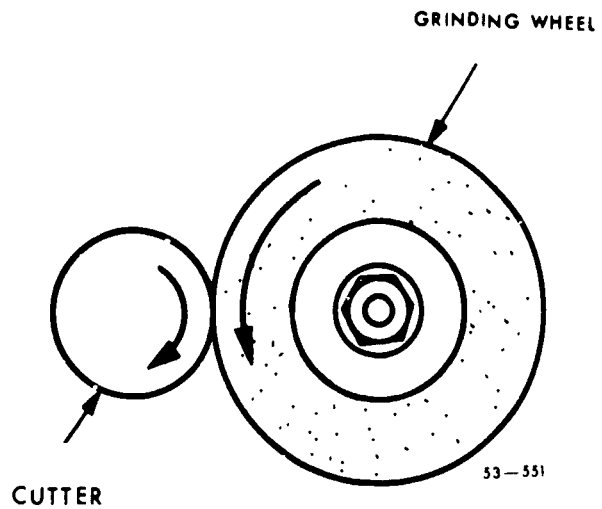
Wheel and cutter rotation for cylindrical grinding
